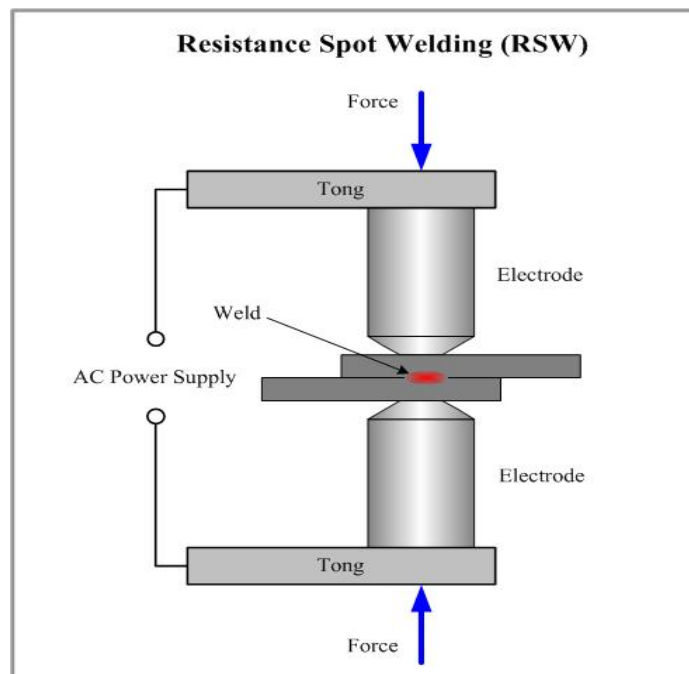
A schematic of resistance spot welding [6].
